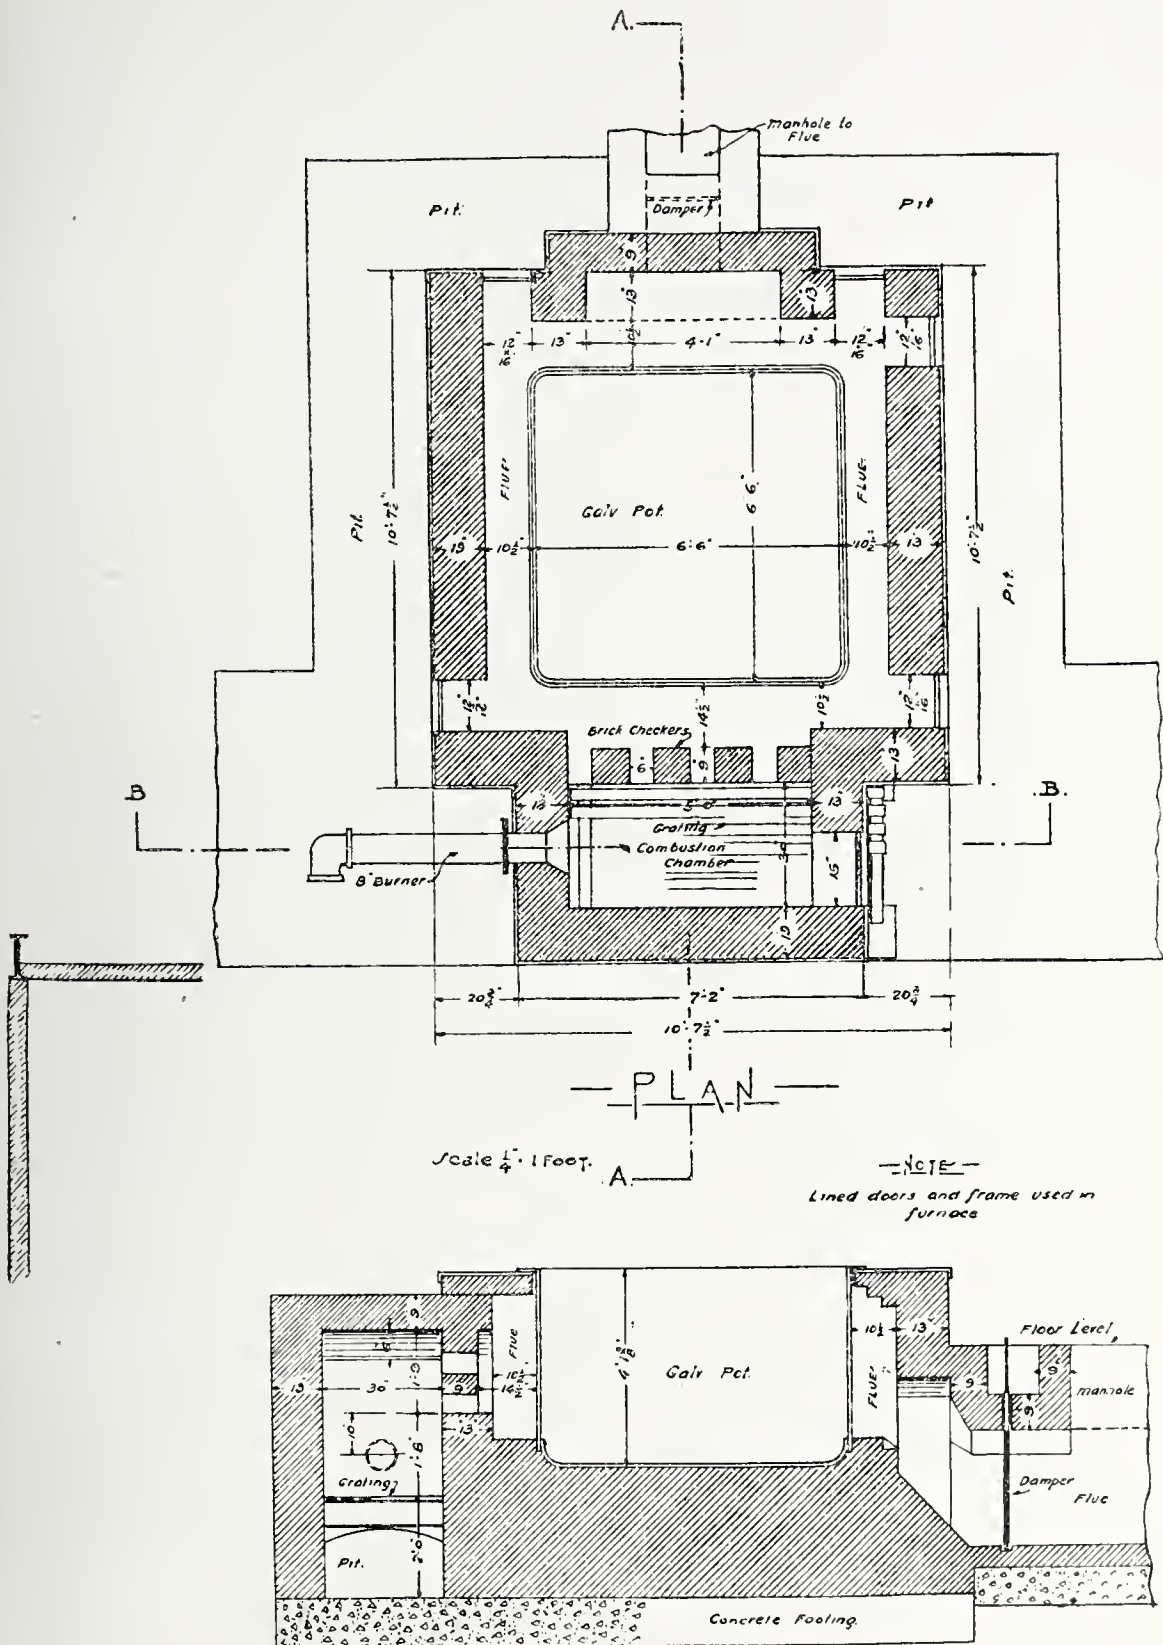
Arrangement of Pulverised Coal Fired Galvanising Kettle, showing Side Combustion Chamber and Quigley Burners. (Quigley Furnaces Specialities Co.)
